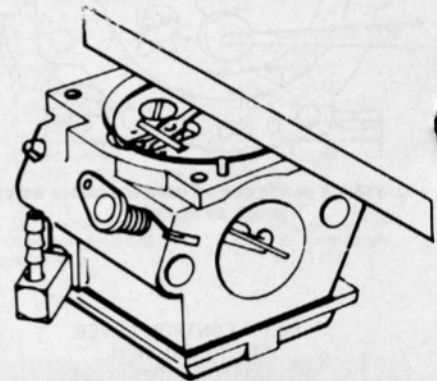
Diaphragm lever on Model HDB or HDC should just touch a straightedge laid on carburetor body as shown.
